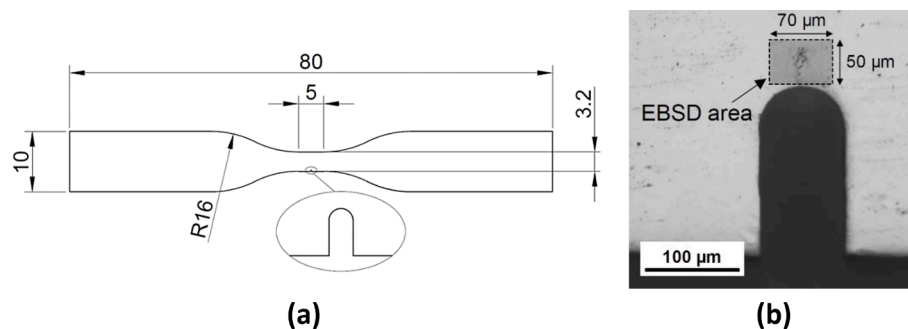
(a) Geometry of the fatigue specimens (dimensions in mm). (b) Example of notch geometry and area scanned with EBSD for Crack 3.
